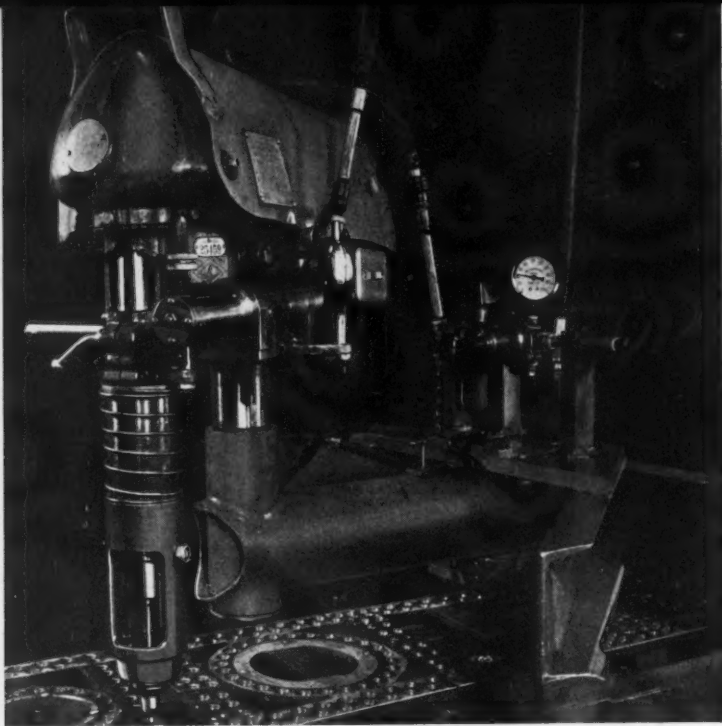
Typical Automatic Punching and Riveting Operation being Performed by the Use of Simple Fixtures of the Type Shown in Fig. 15
